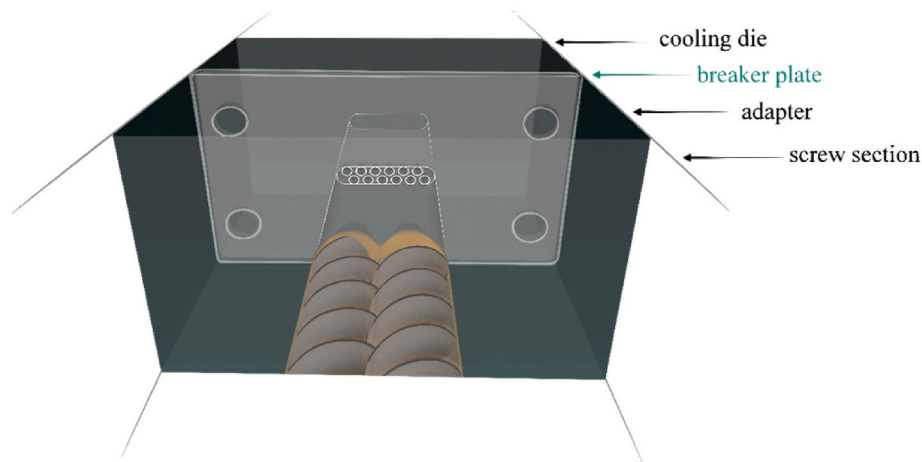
Schematic showing the positioning of the breaker plate within the relevant section of the extruder, specifically located between the adapter and the cooling die.
